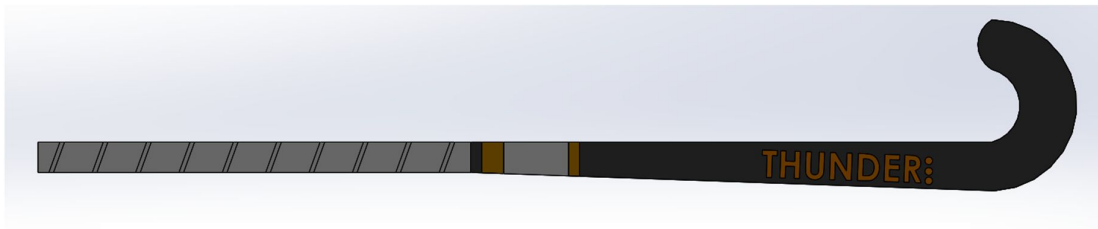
Thunder TH-Triskelion stick assembly 3D CAD (Source: Own)
